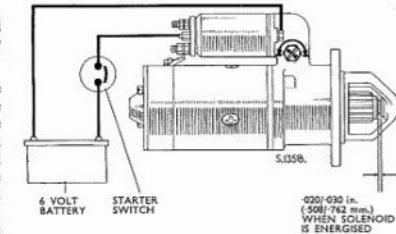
Setting the pinion movement limit (M45G type starter motor)
